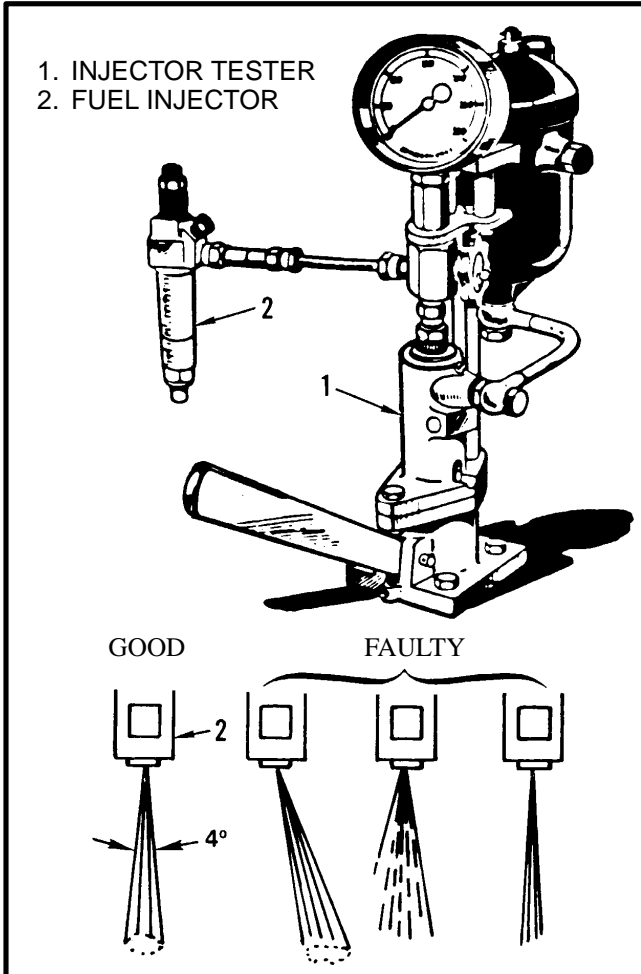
DEVICE TO CHECK THE FUEL INJECTORS
